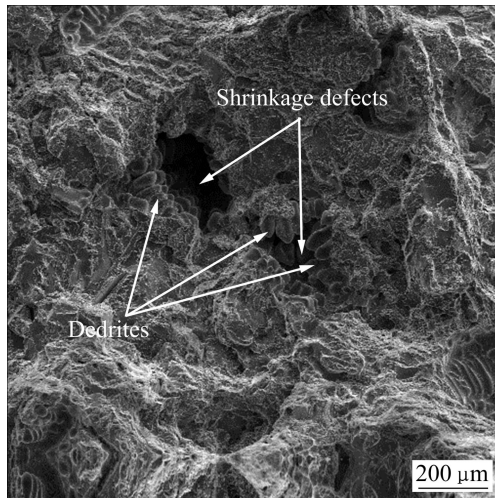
Typical tensile fracture surface of welded cast A356 alloy with filler ER1100 under frequency of 5 Hz
